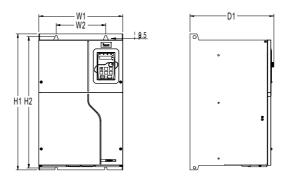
380V 110–132kW VFD wall-mounting diagram
